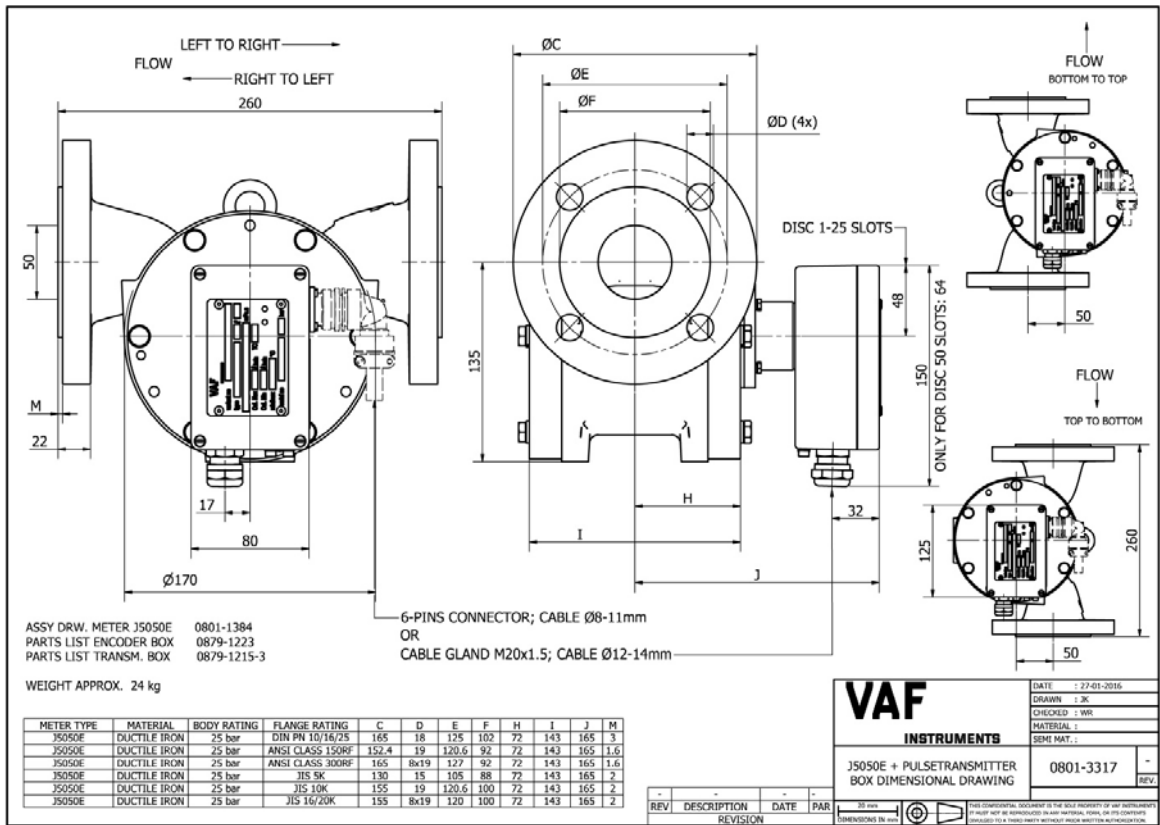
Drawing 0801-3317 – Dimensional drawing J5050E Pulse transmitter box
